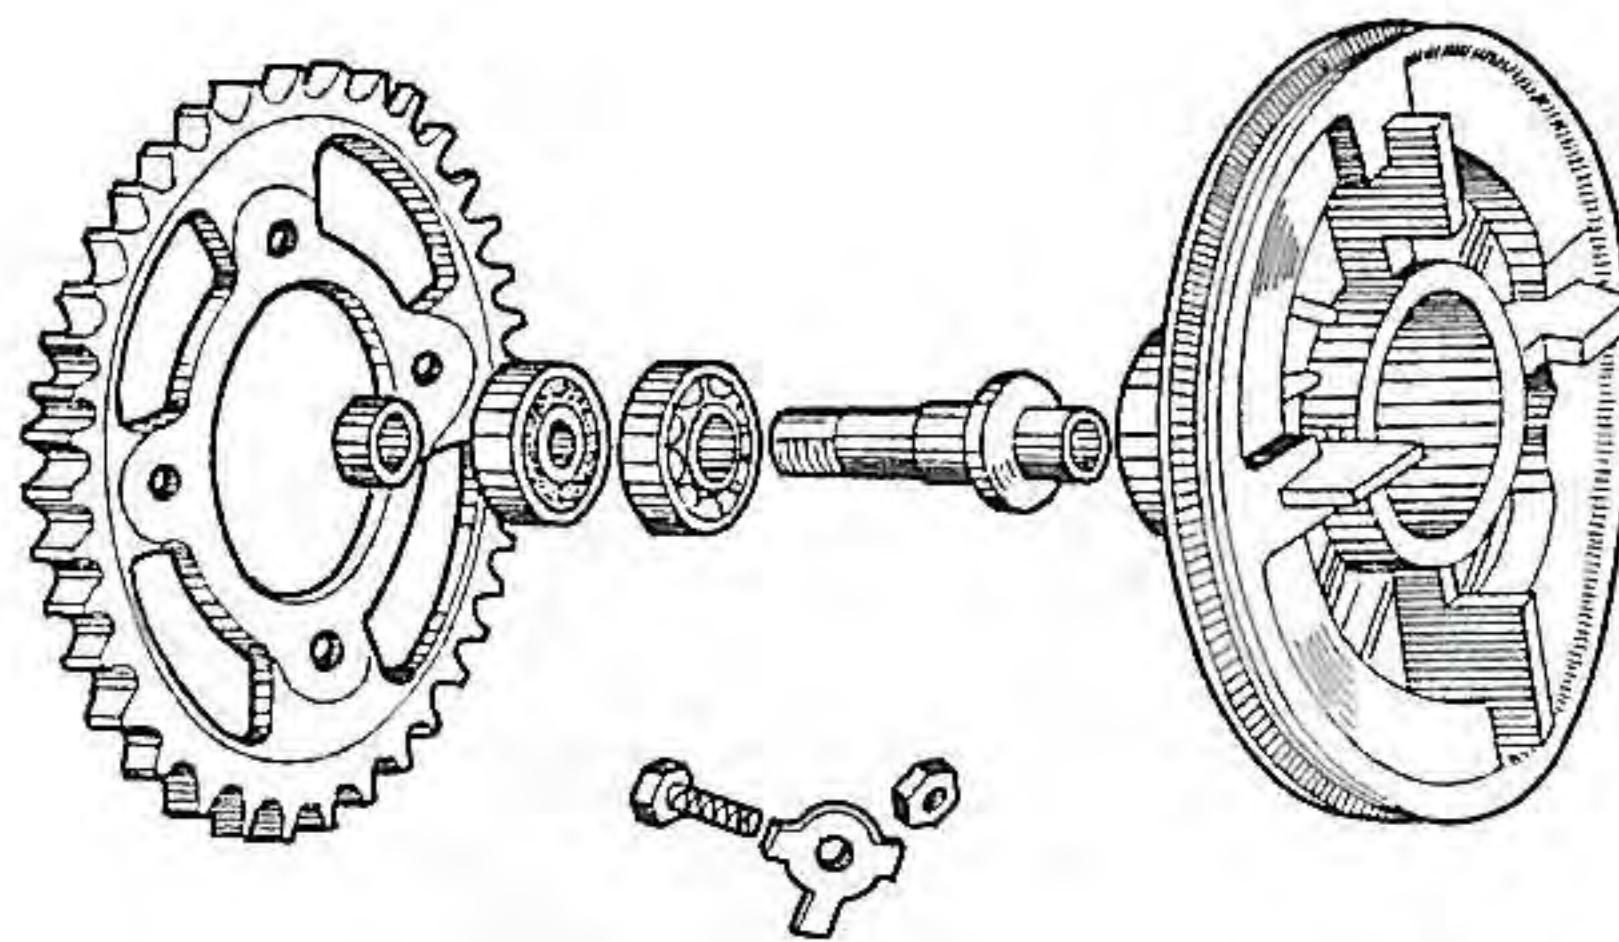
Rear drive flange and sprocket (C92 & CA95)
